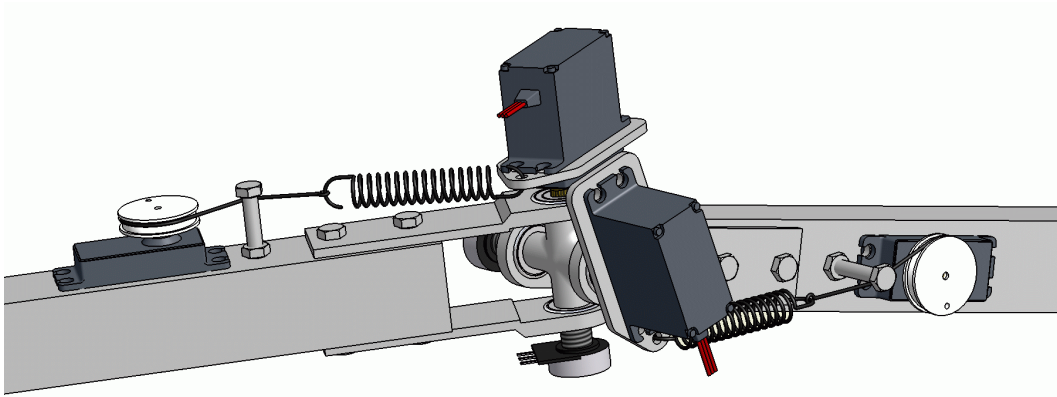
Equilibrium position actuator placed on cross piece of the universal joint.
